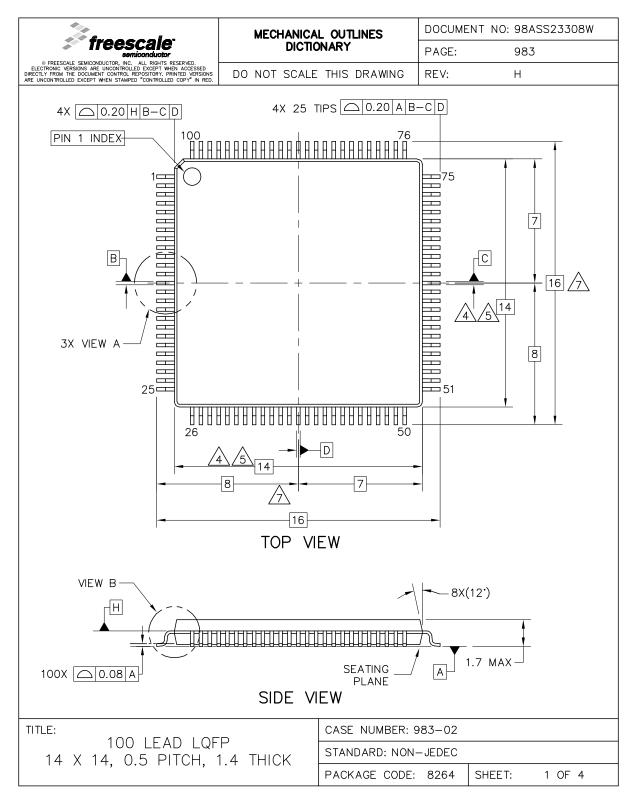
100 LQFP Package Mechanical Drawing (part 1)
